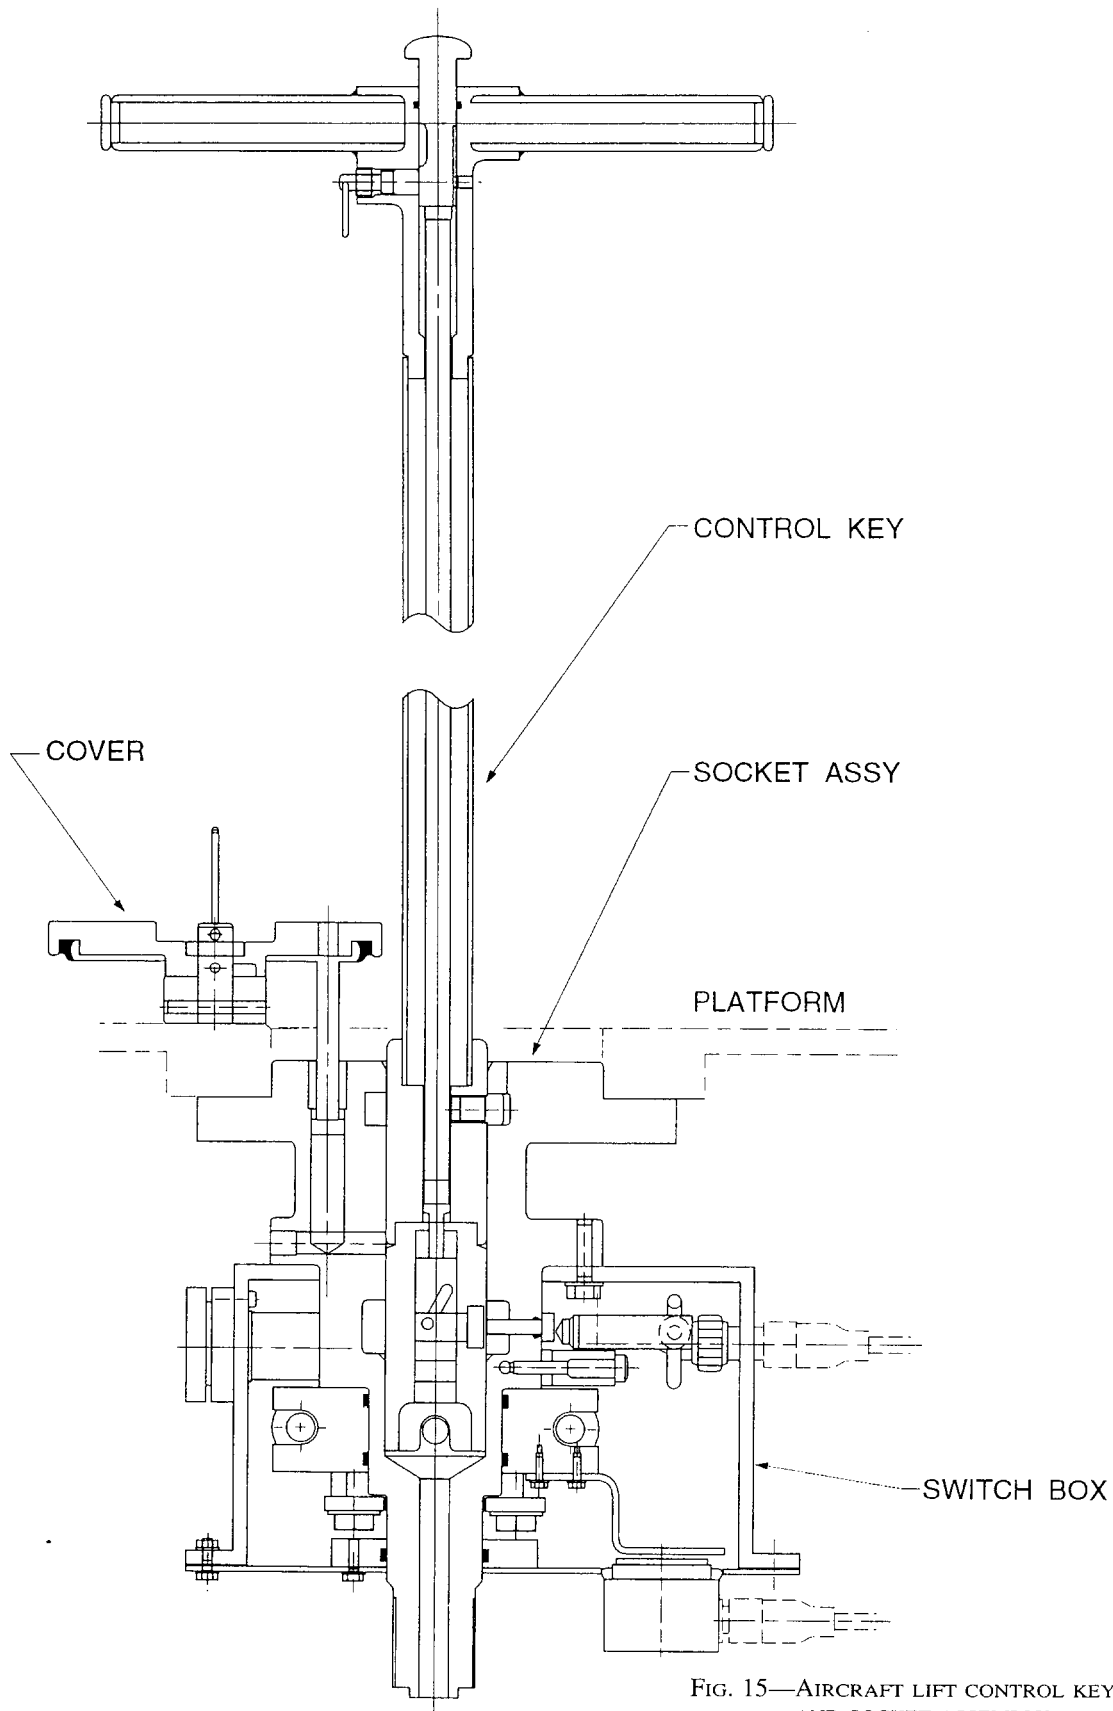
AIRCRAFT LIFT CONTROL KEY AND SOCKET ASSEMBLY
